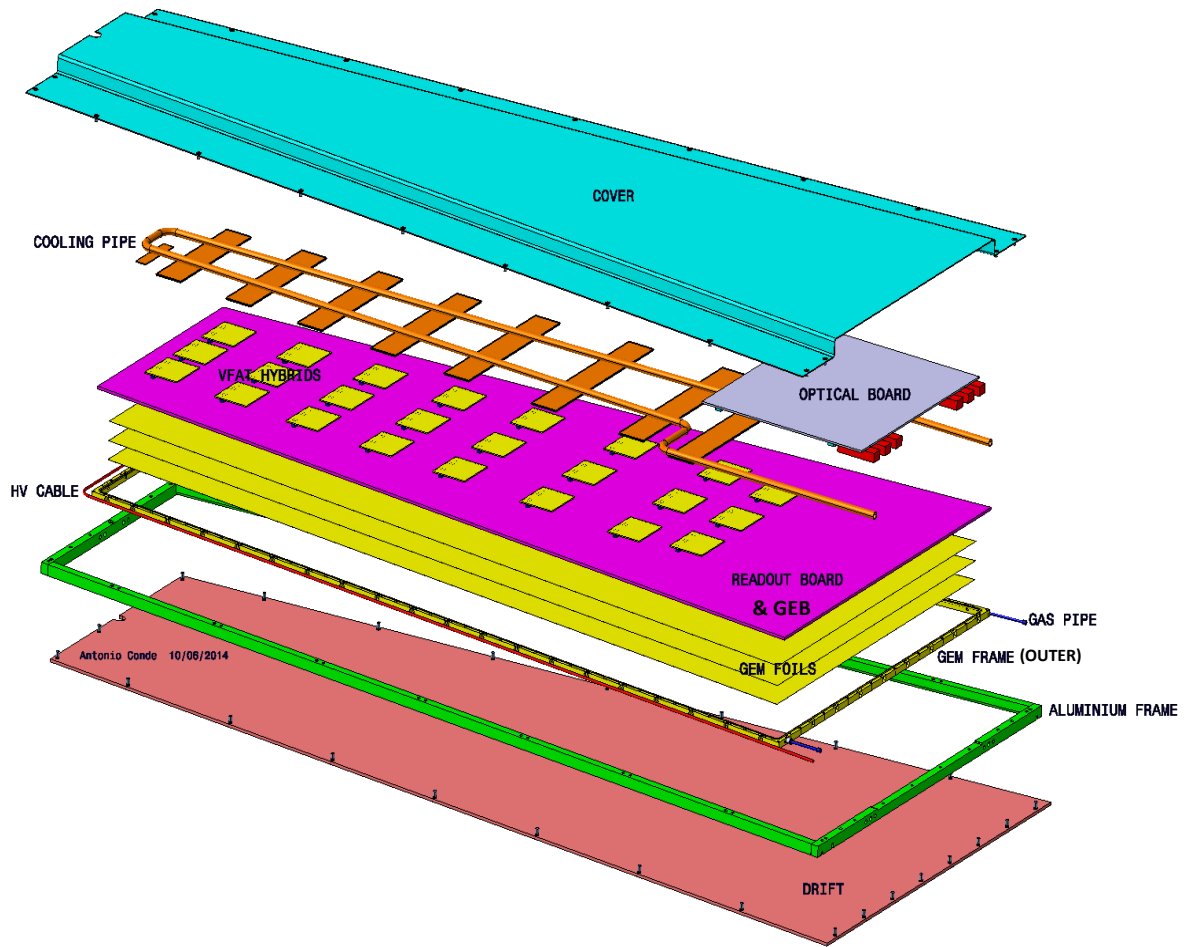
Exploded view of the mechanical design of a single CMS triple-GEM module.
